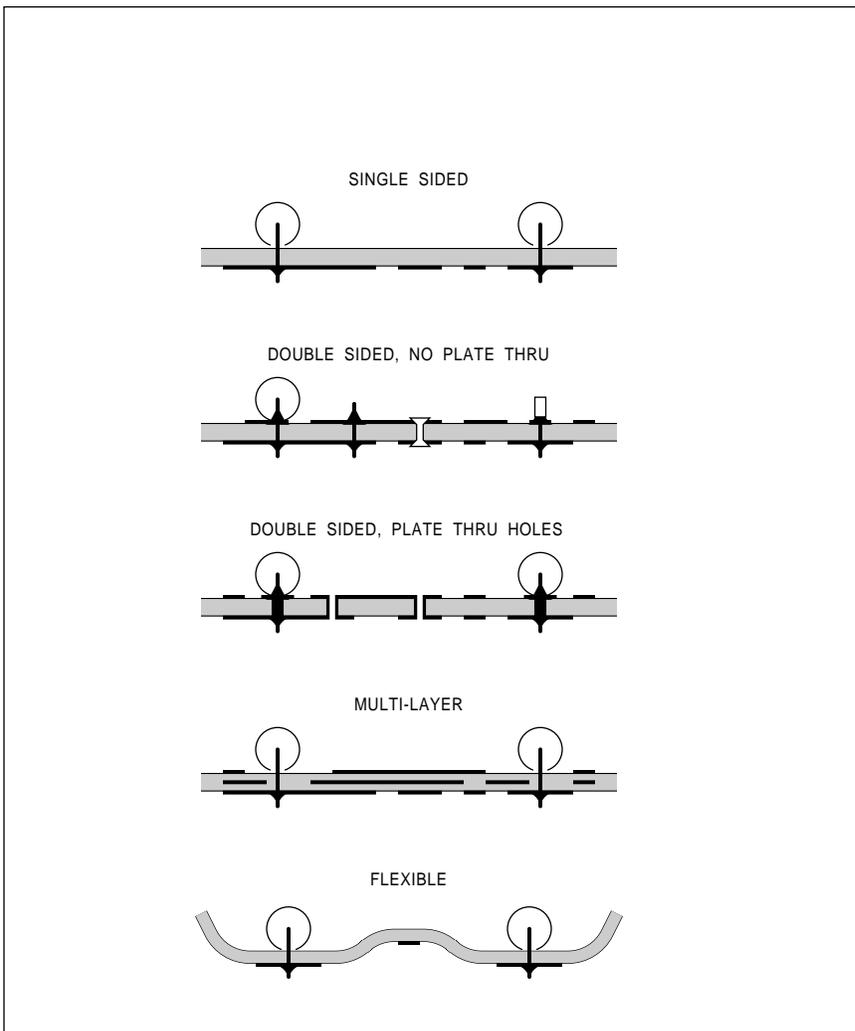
SEVERAL POPULAR TYPES of printed circuit boards. Note that a double sided plate thru board can be hacker faked by using component leads, eyelets, wire tabs, or low cost individual pin sockets.
